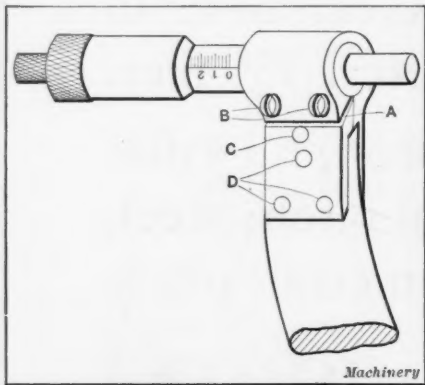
Arrangement of the Clamp for holding the Micrometer Head
